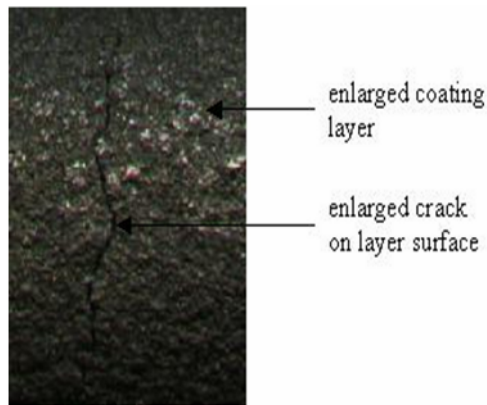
Typical photograph of the crack initiation on the layer surface.
